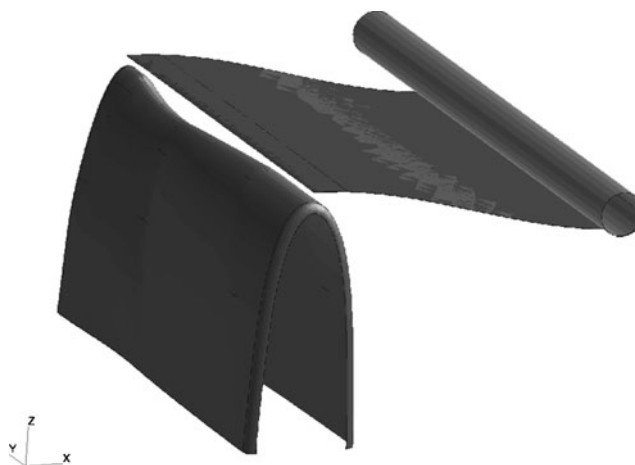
Skin parts after stretch formingFig. 6 Parts with recognized grid points and beacons
